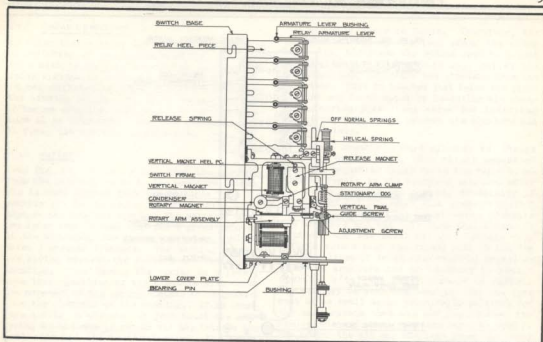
CONNECTOR SWITCH, LEFT VIEW
